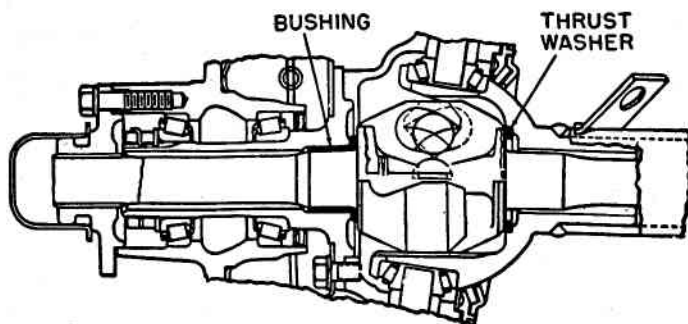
Bendix type axle shaft and universal joint. For "live" front axles
